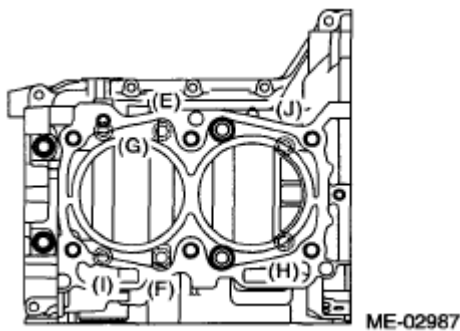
Tightening Sequence Of Cylinder Block Connecting Bolts - RH Side
